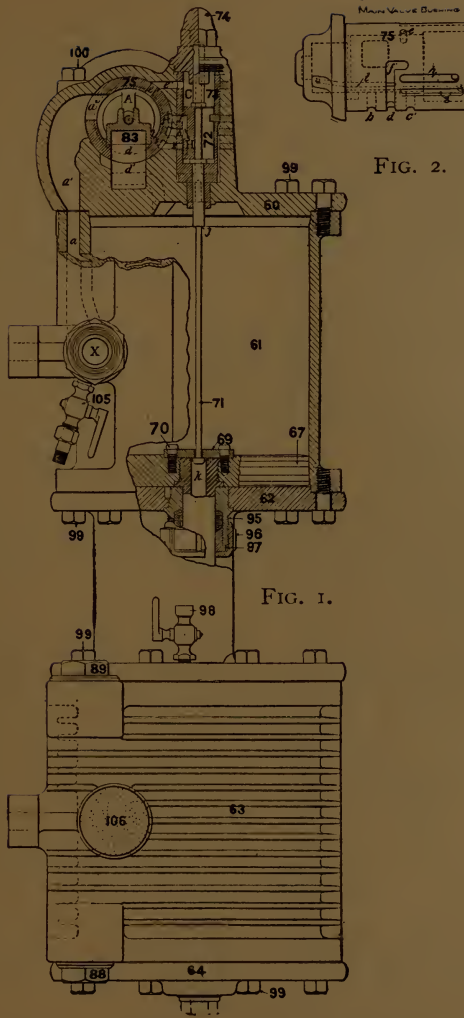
THE NINE AND ONE-HALF INCH IMPROVED AIR PUMP.
